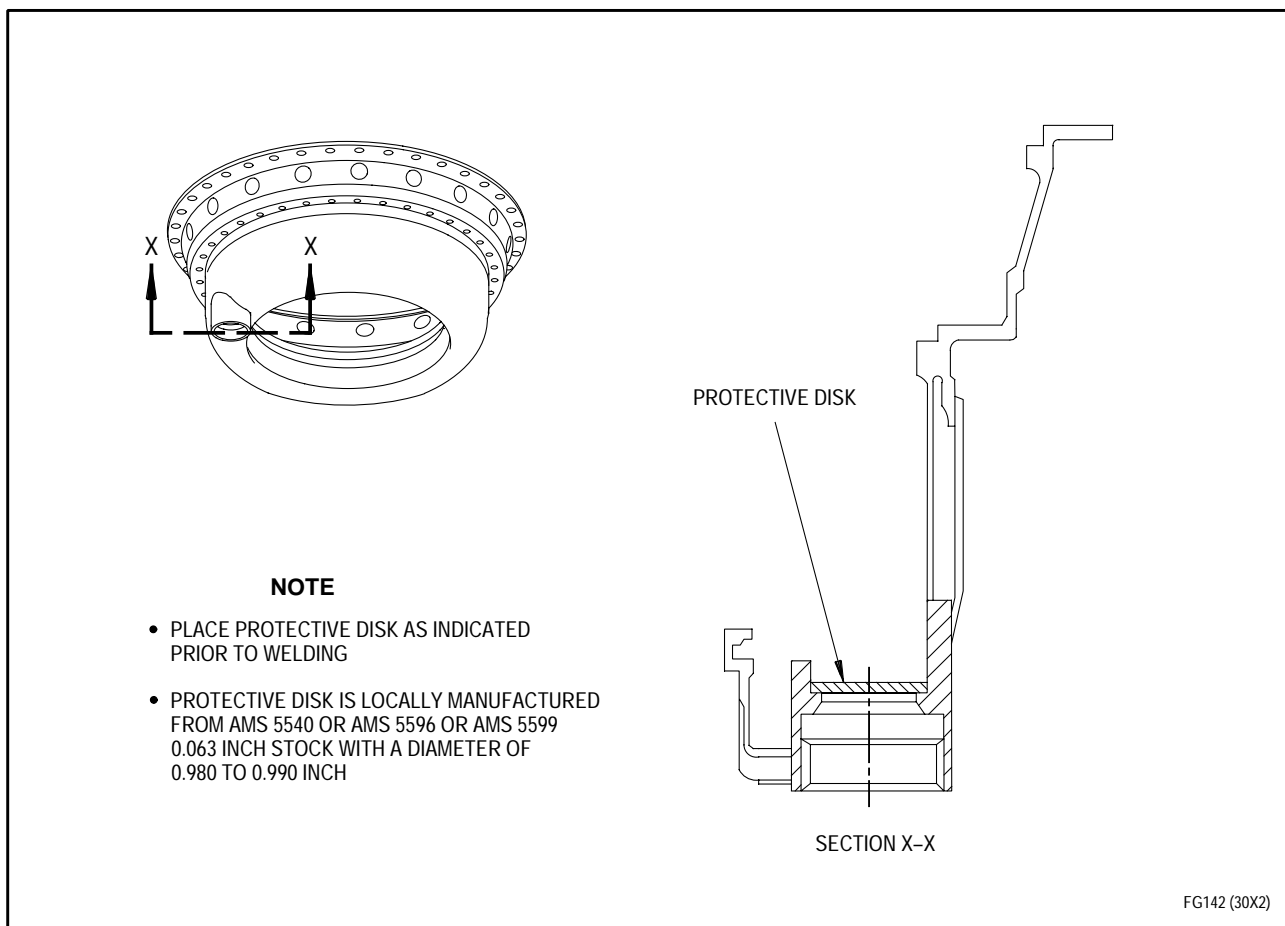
No. 4 Bearing Front Seal Support Assembly - Weld Repair (Sheet 2 of 4)
